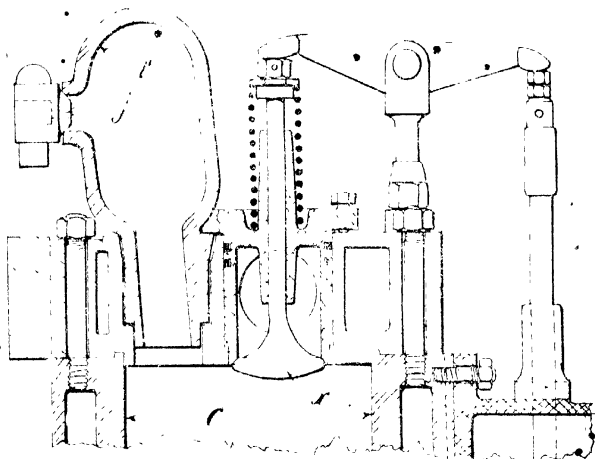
Sectional elevation of injection vaporiser and cylinder head used in the Hen fuel-oil marine engine.
